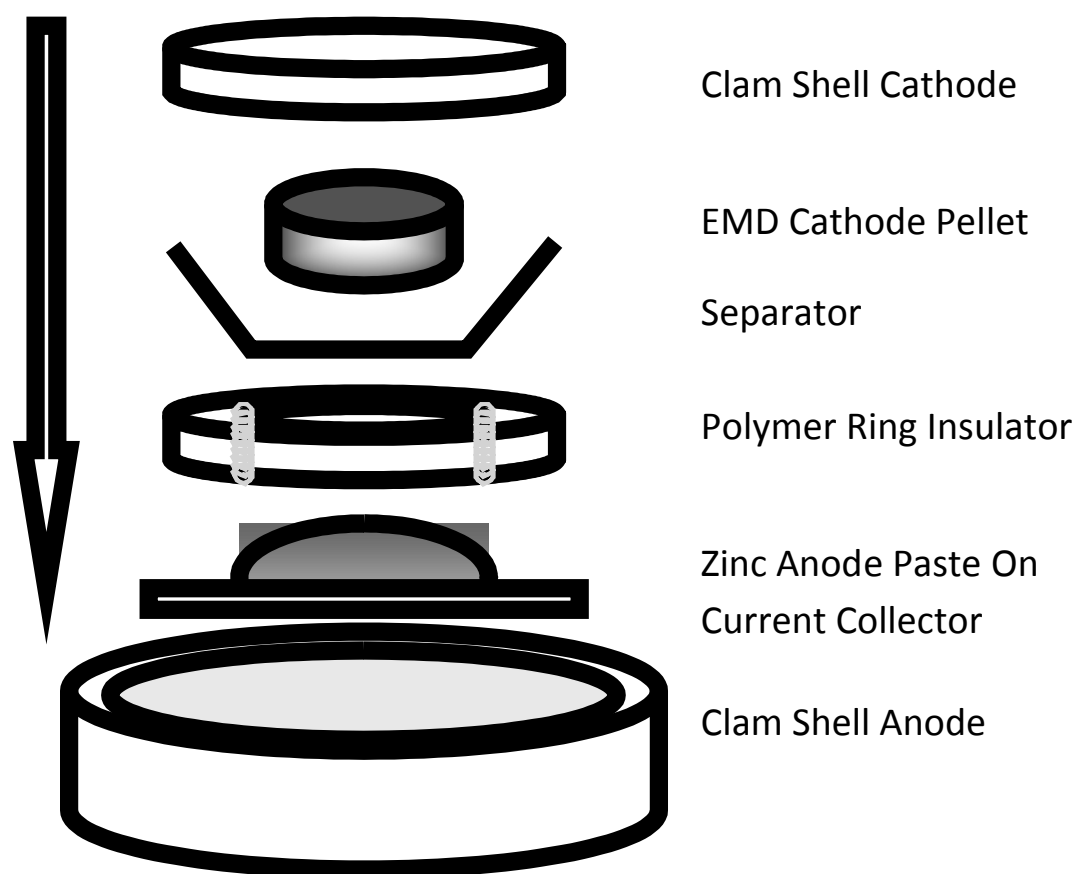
Exploded diagram of an alkaline battery assembled within a stainless steel clamshell casing. The outer diameter of the nylon insulator ring is 29 mm and matches the inner diameter of the anode. The inner diameter of the insulator ring is 19 mm and matches the outer diameter of the cathode current collector. The entire assembly is held intact by wing nuts torqued to finger tightness.
